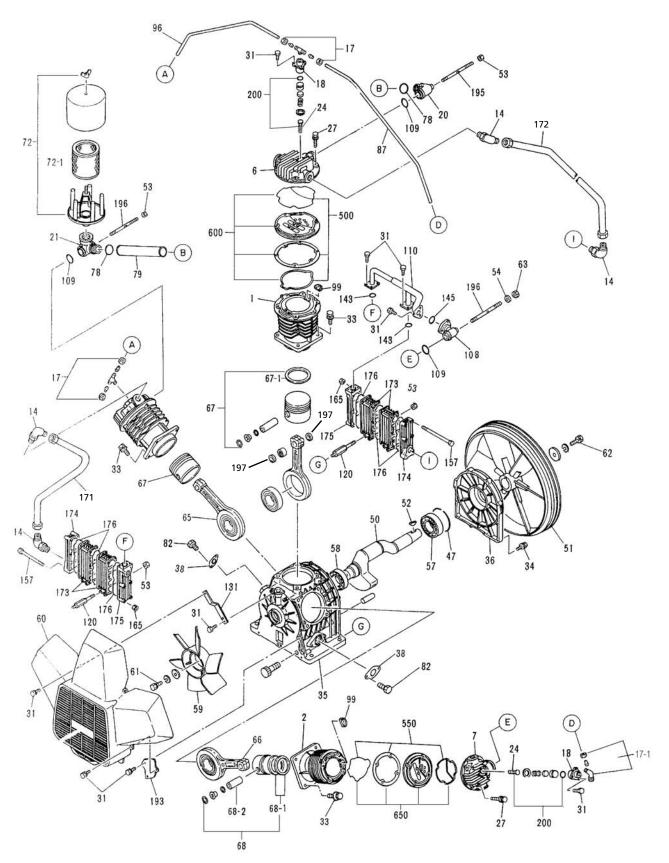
Replacement Parts Illustration for OPT100 and OPT150
